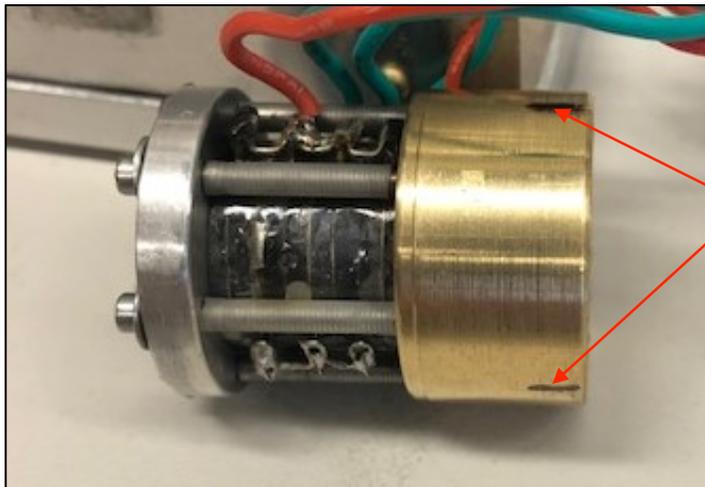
The brass mass holes for the mounting screws were marked so the same holes were used for all the mounting brackets tested.
